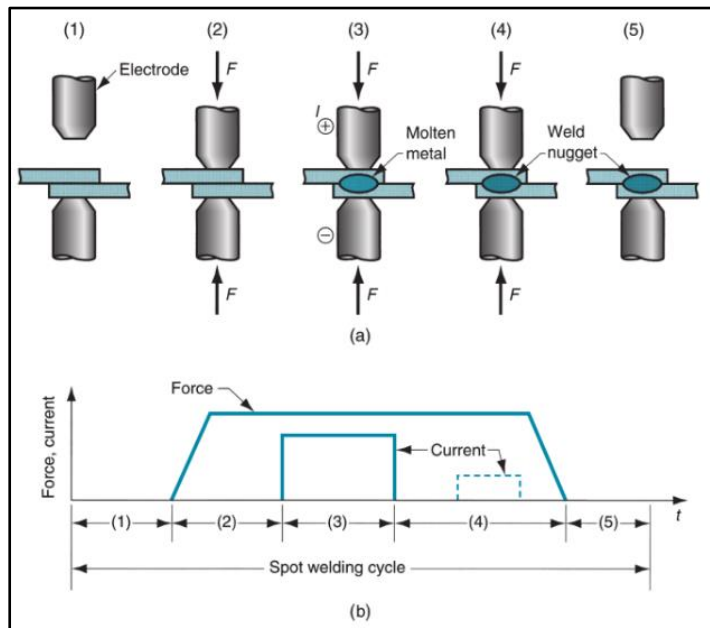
Fundamental steps of Resistance Spot Welding Process [10]
